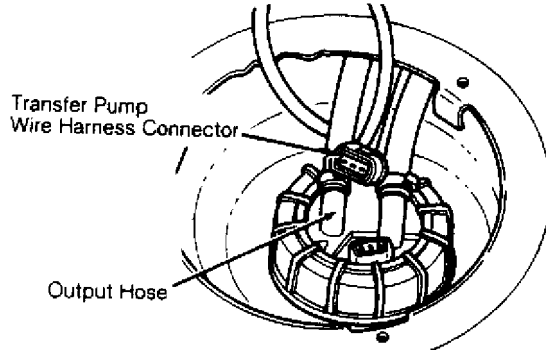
Checking Transfer Pump Fuel Volume (Typical)
